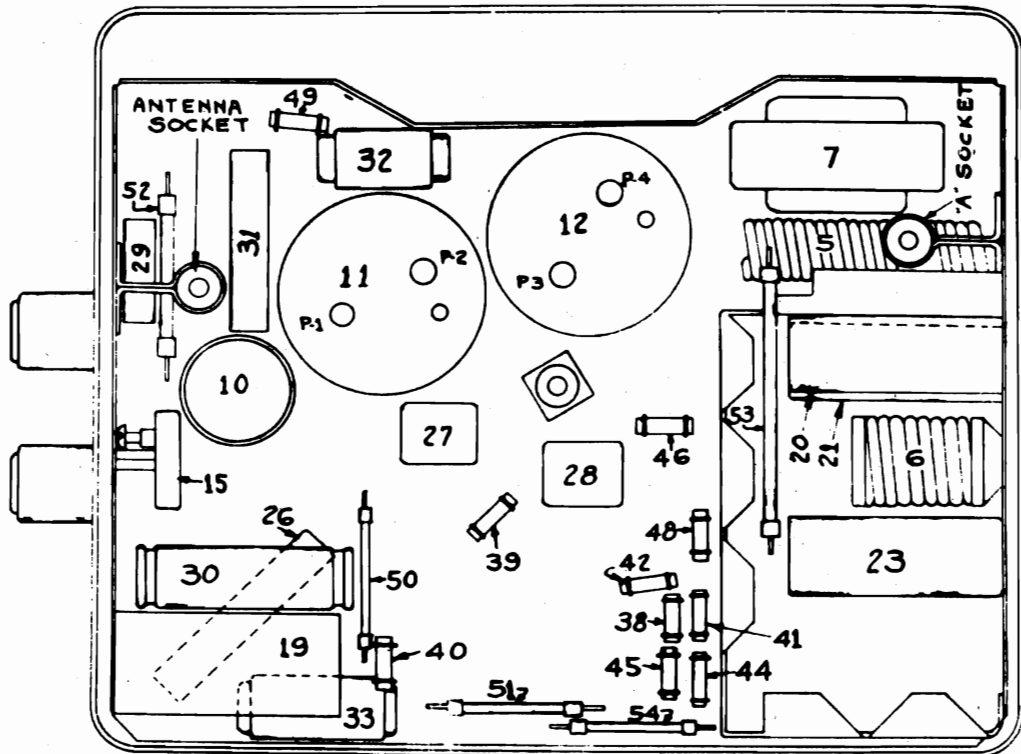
PARTS LAYOUT--BOTTOM VIEW
